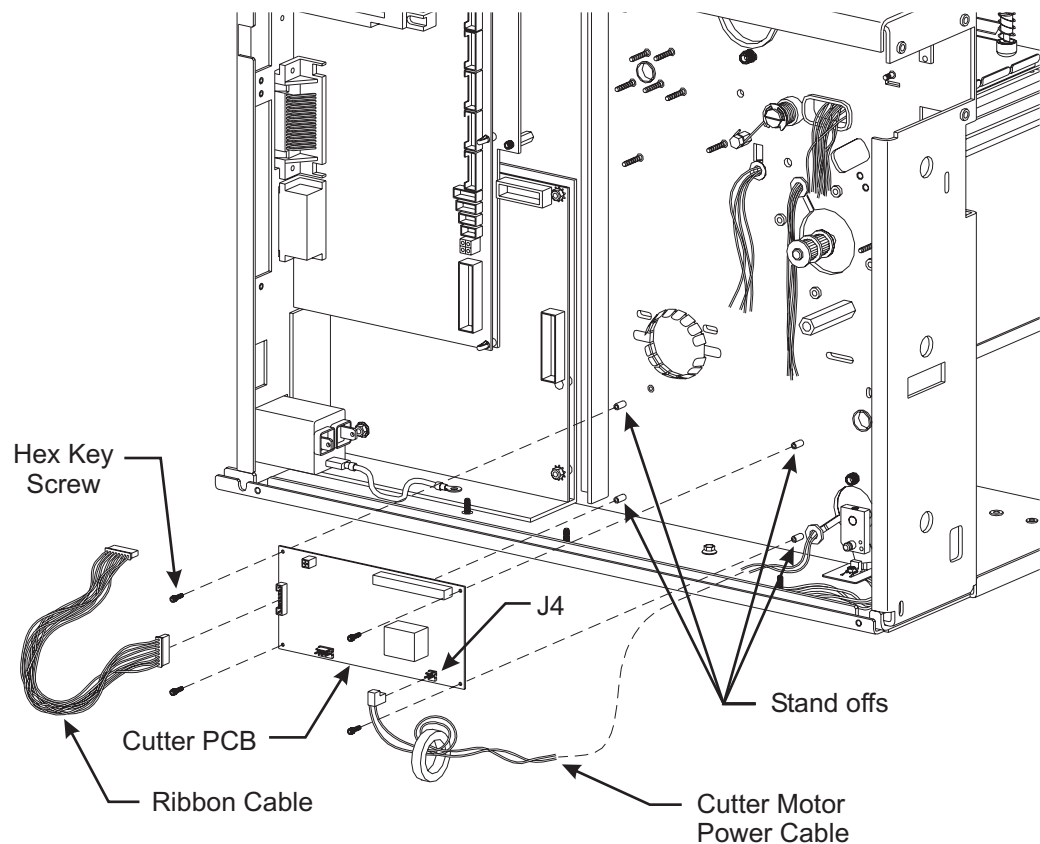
Cutter PCB Removal and Installation (X/III and R-140 shown)
